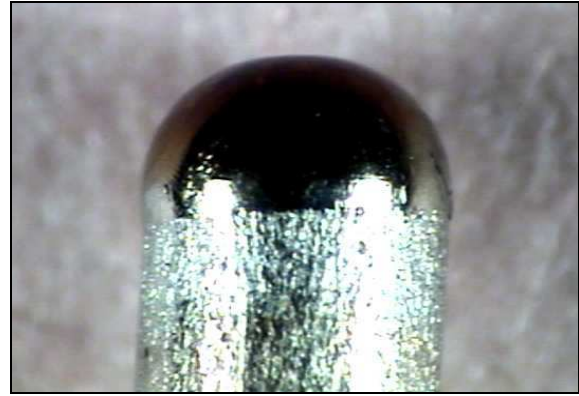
Titanium tube sealing with adjusted welding parameters (second end).
